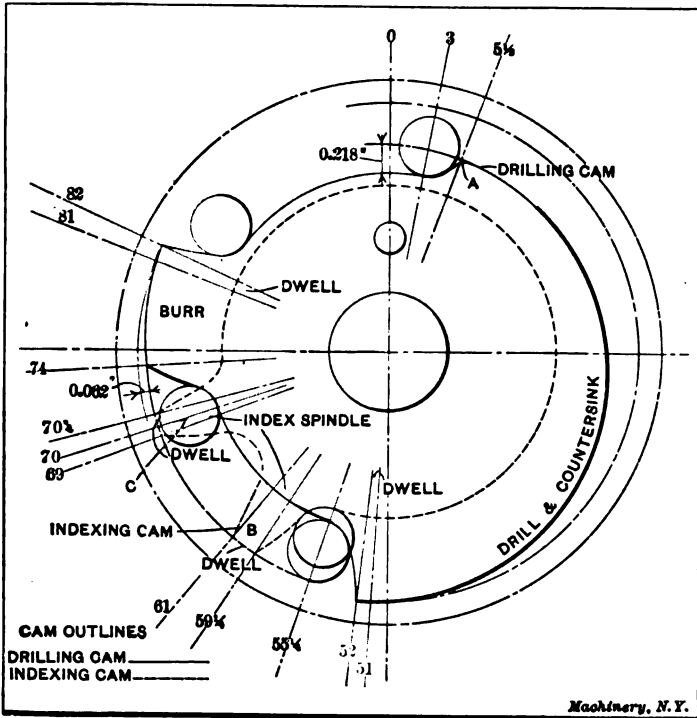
Indexing and Drilling Cams for the Piece shown at A in Fig. 14
